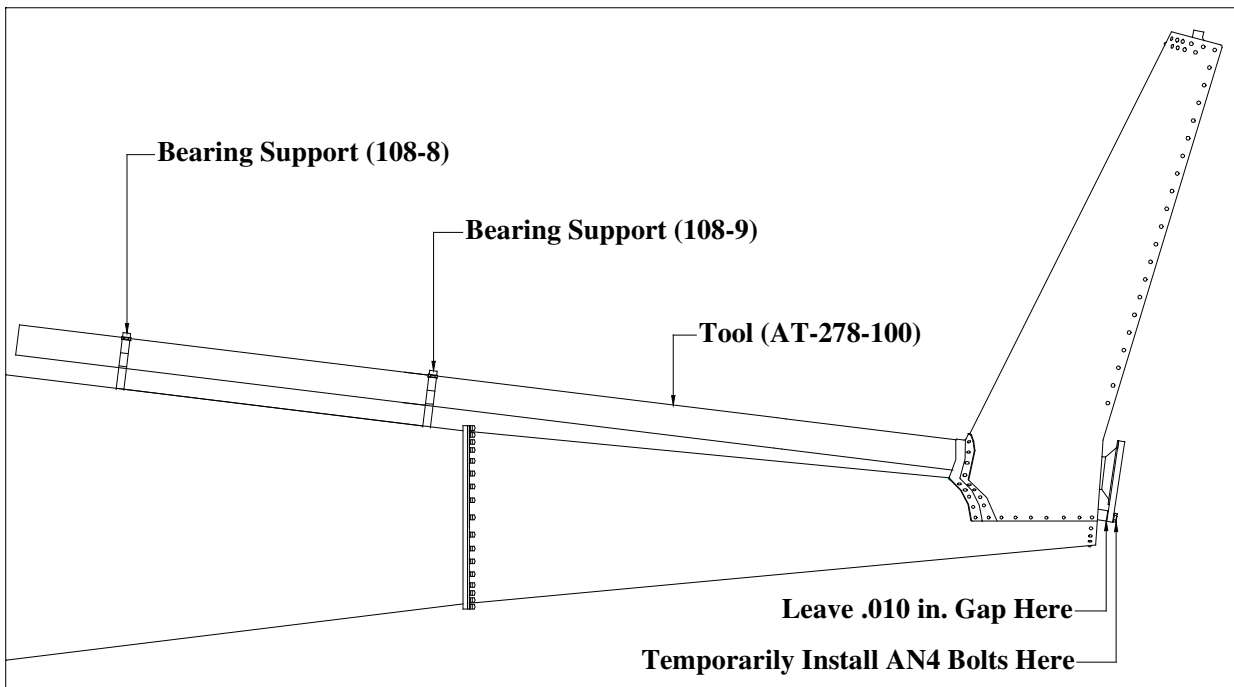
Aft End Alignment Tool (AT-278-100) Installation
